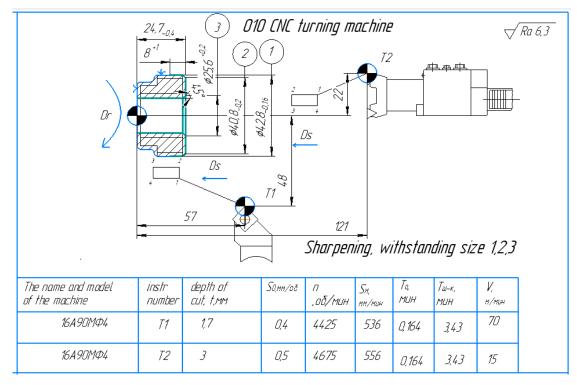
Operational drawing of CNC turning machine in Kompas 3D
